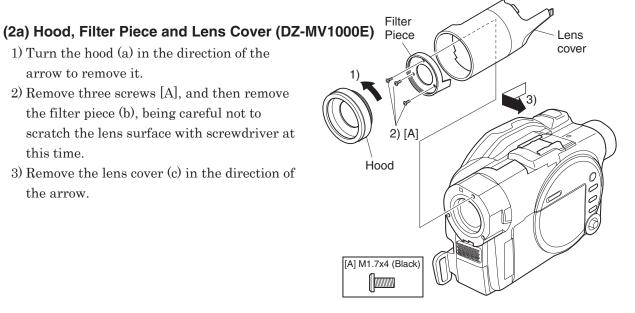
Hood, Filter Piece and Lens Cover
